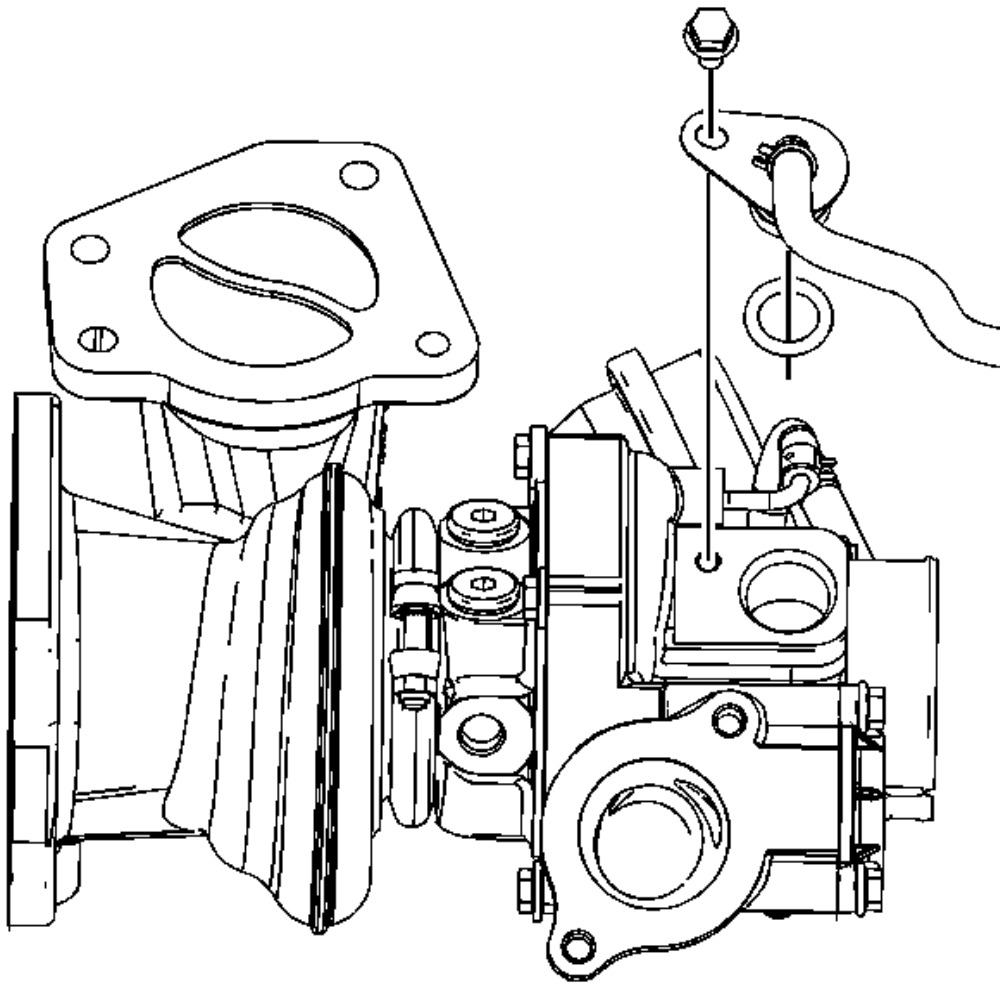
View Of PCV Fitting, Bolt & Pipe
